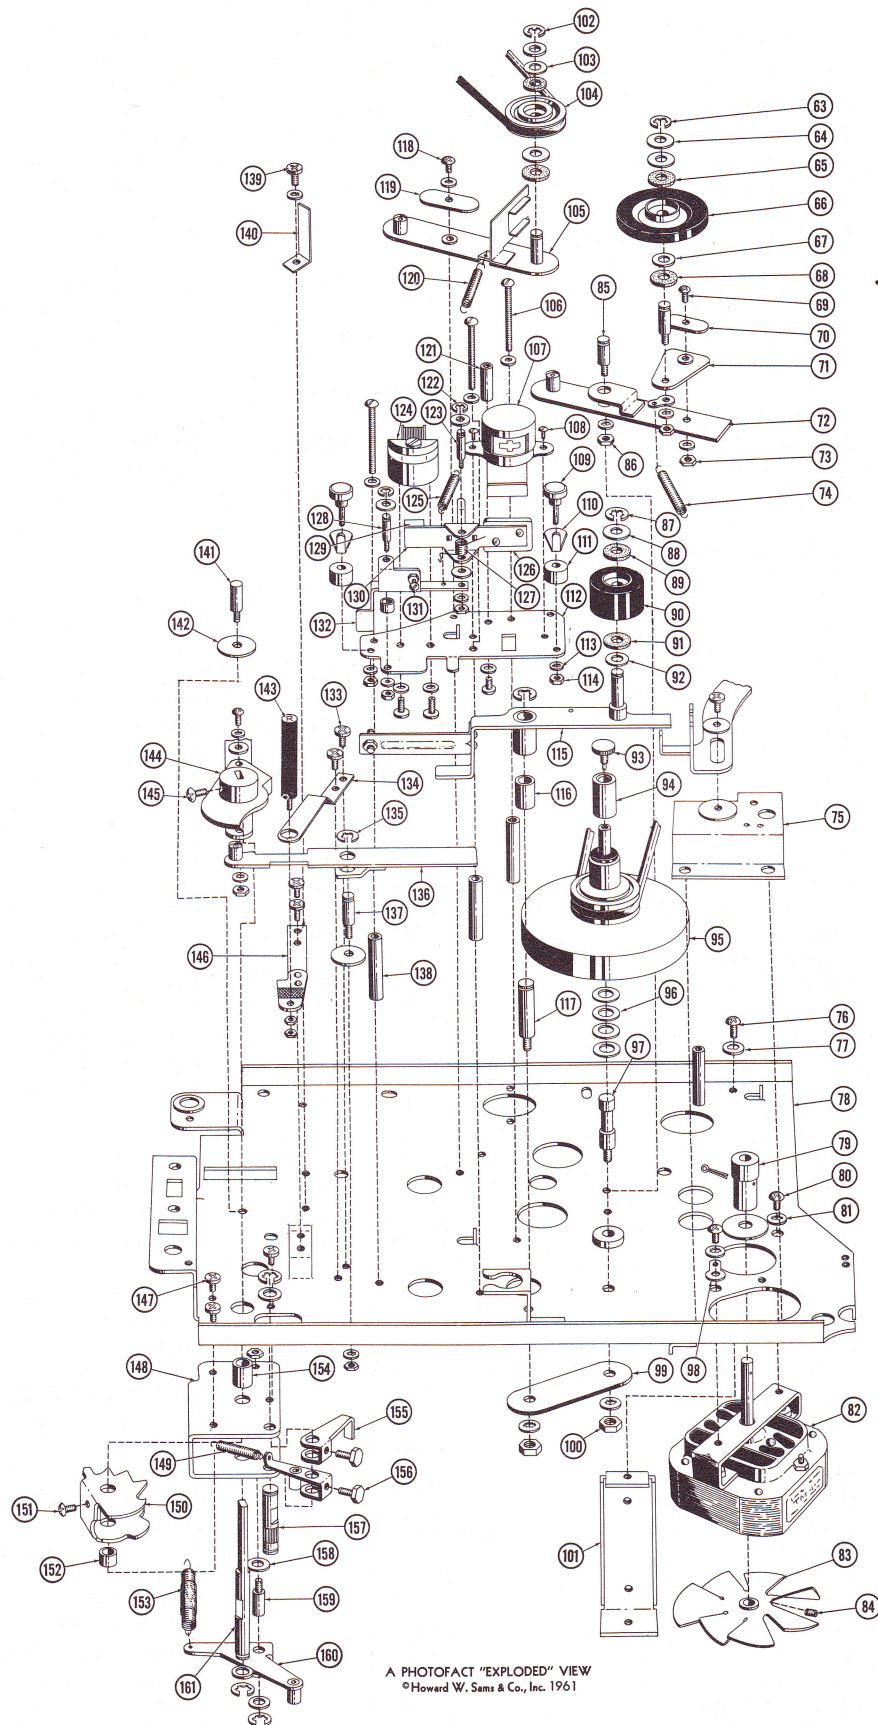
A EXPLODED VIEW OF PARTS BELOW DRESS PLATE
